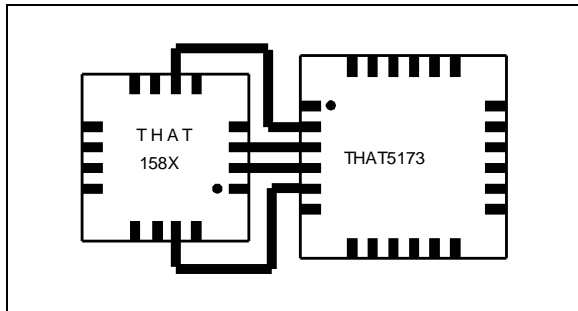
Recommended THAT158X/THAT5173 PCB Layout (mounted on same-side of PCB).
